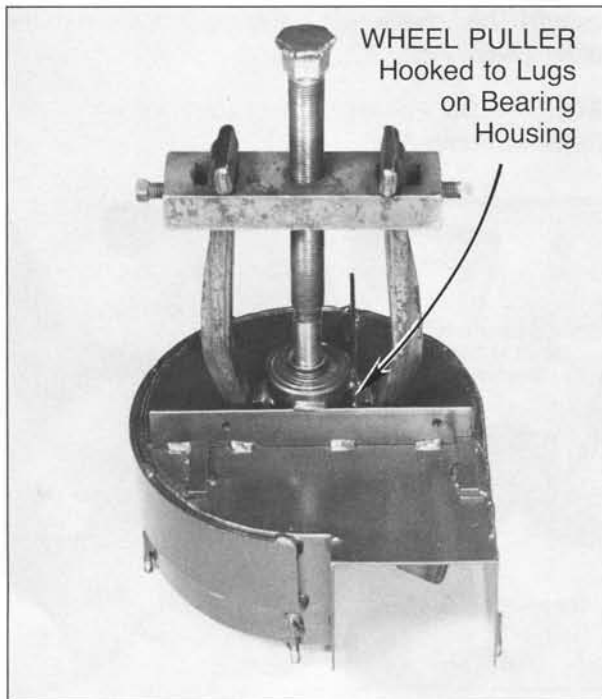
Pressing Blower Wheel Out of Housing
